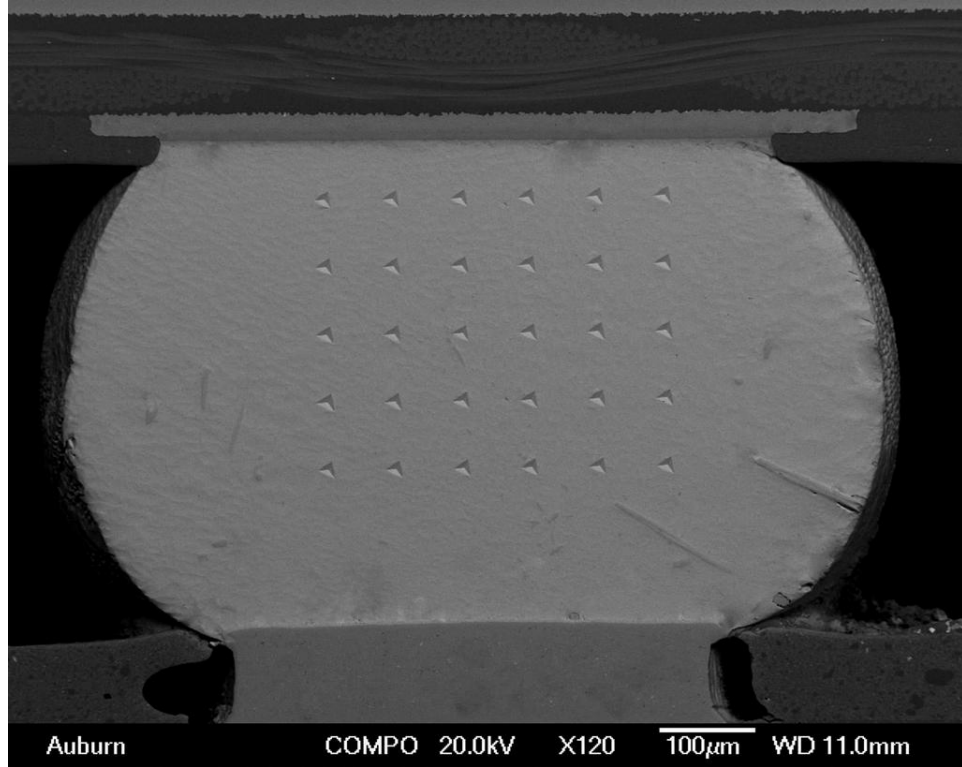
SAC305 Solder Joint after Nanoindentation Testing
